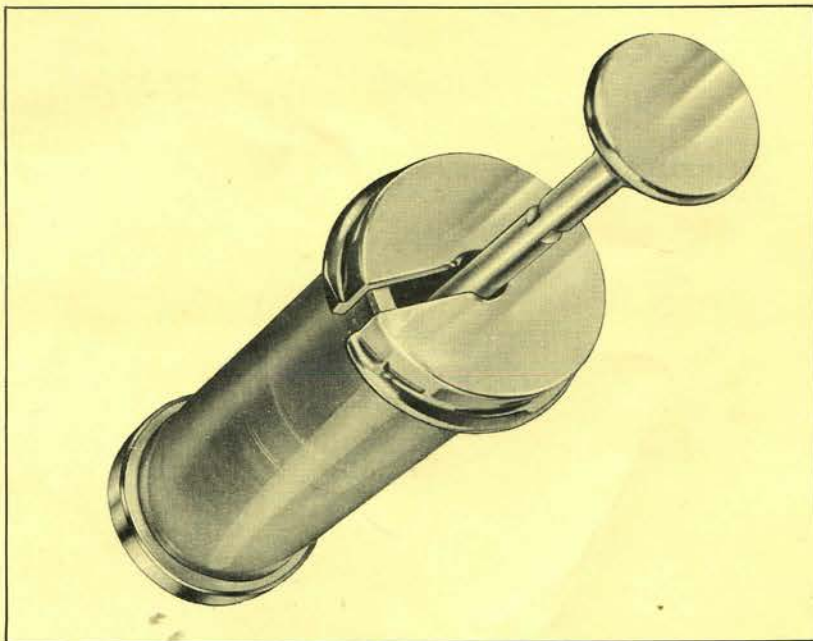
Surgical syringe with metal end caps hermetically sealed to glass barrel with MCP Bismuth solder.
